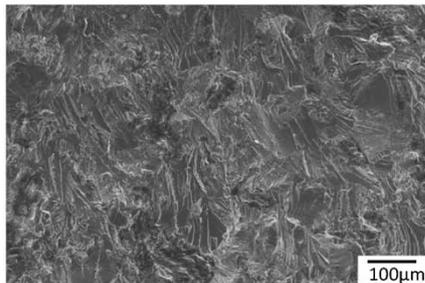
Fractograph in rotary bending fatigue test under optimized condition of forging
